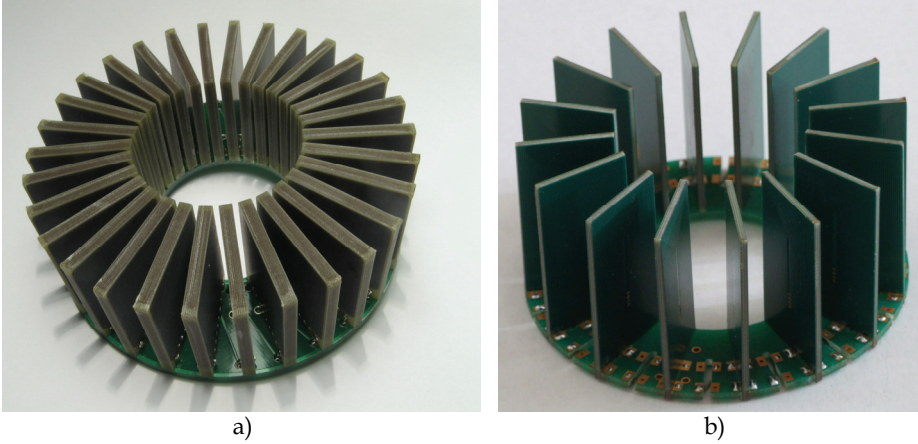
a) Rogowski coil with pin mounted multilayer boards, b) Rogowski coil with multilayer boards squeezed into the base board
